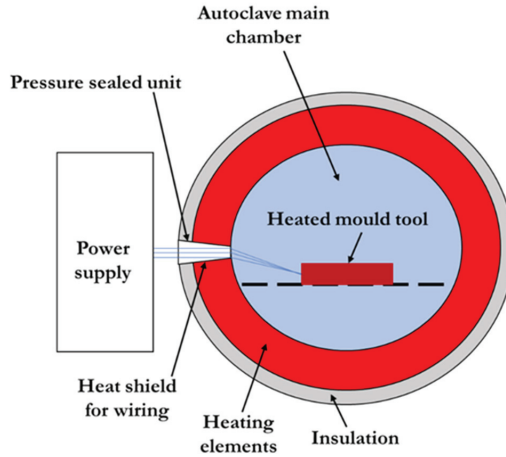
Schematic of the power-supply mechanism for the heated mould tool inside the autoclave chamber (redrawn from [18]).
